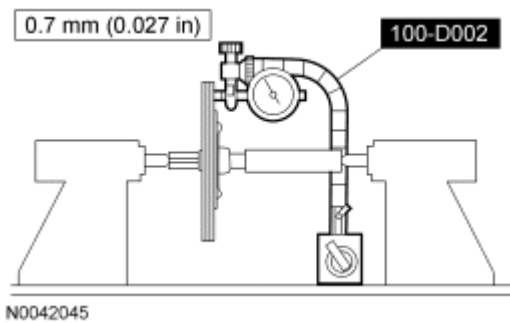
Checking Maximum Allowable Runout Of Clutch Disc
